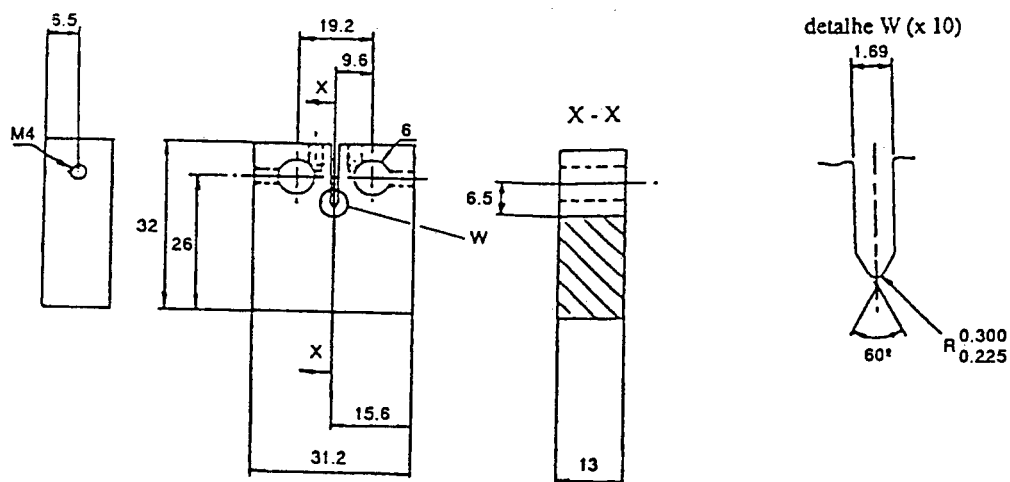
CT specimen geometry used for fatigue and creep tests.
